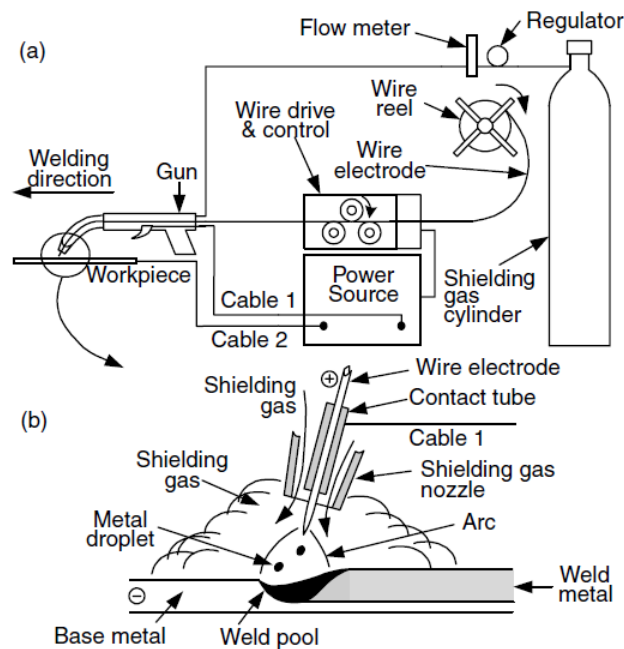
Flux-Core Arc welding: (a) overall process; (b) welding area enlarged
